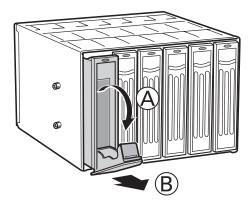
Releasing Drive Carrier from Hot Swap Cage
